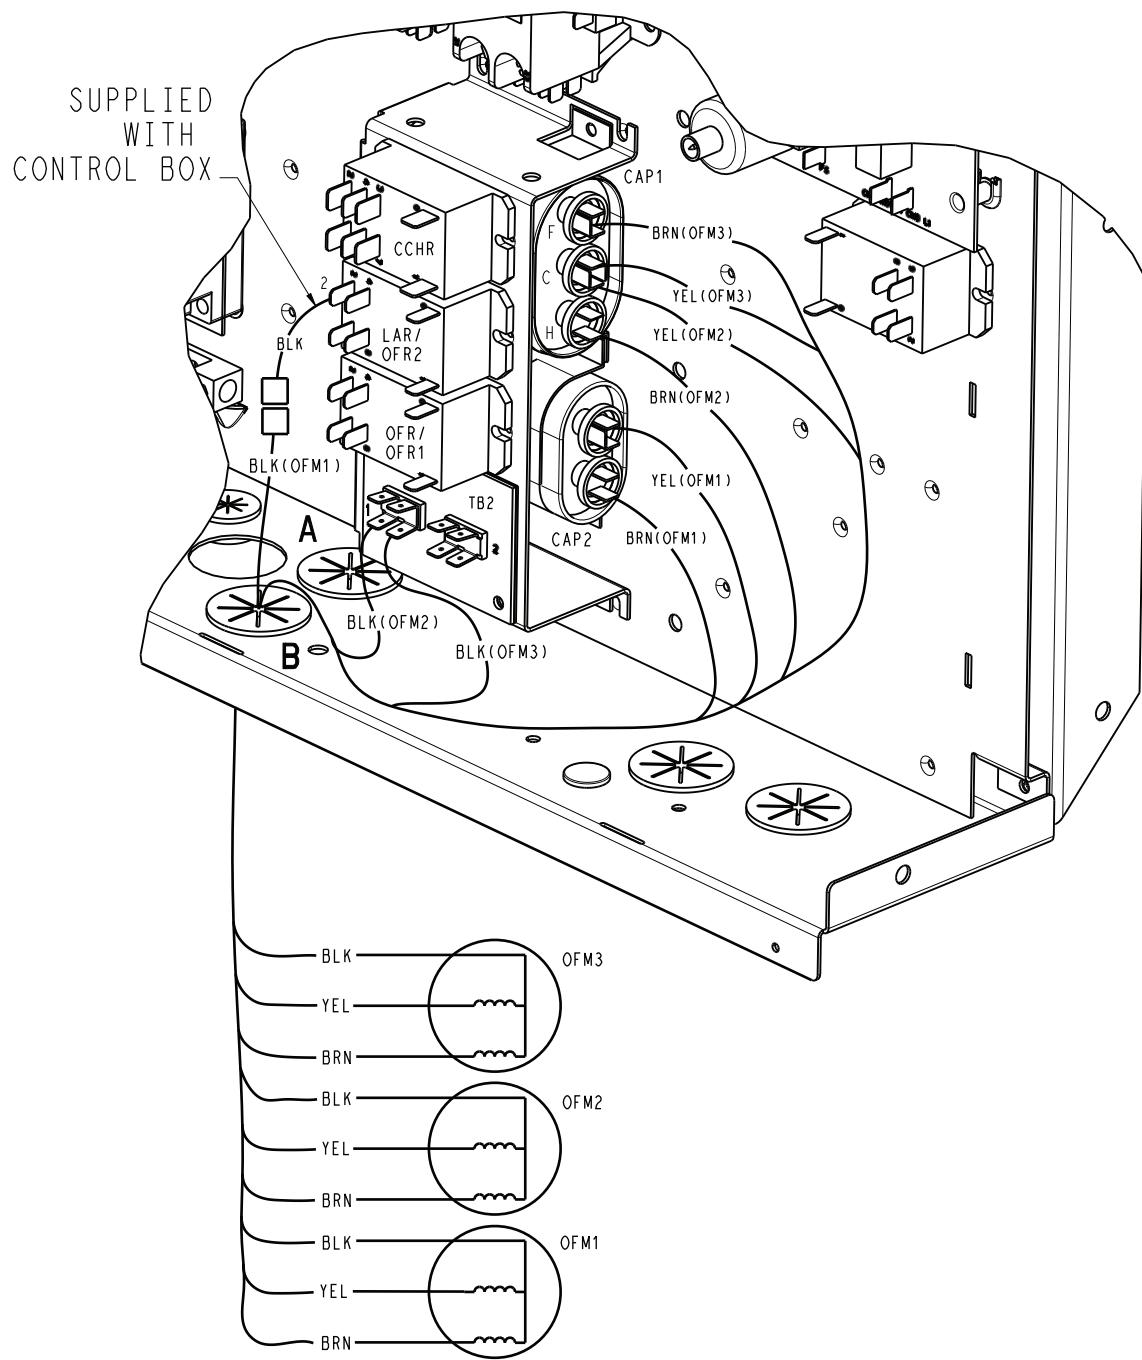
Cabinet B — Motor Wiring Inside Control Box
